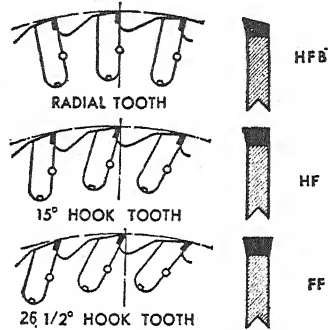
The Disston Carboly-Tipped Blades for Circular Saws.
